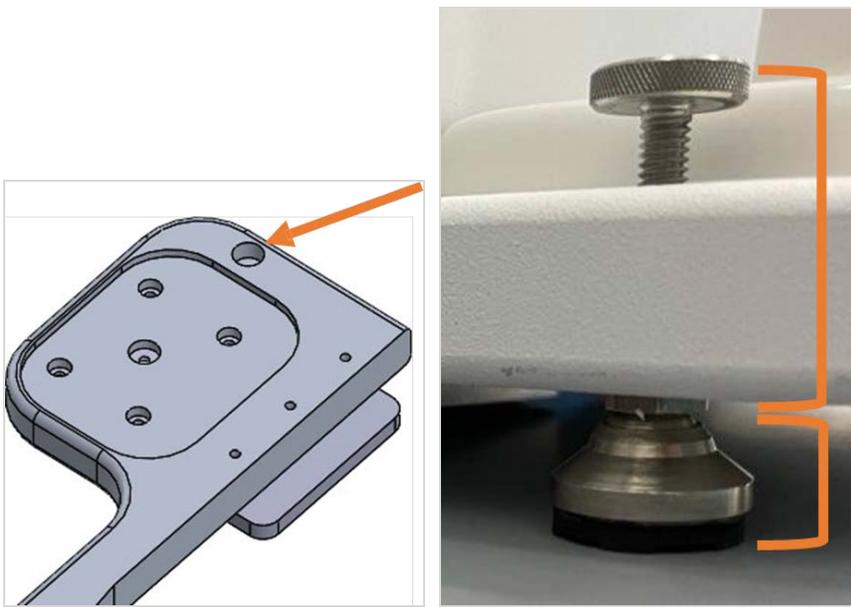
Hole for knurled head thumb screw assembly (foot) (reverse for right side AIO)
